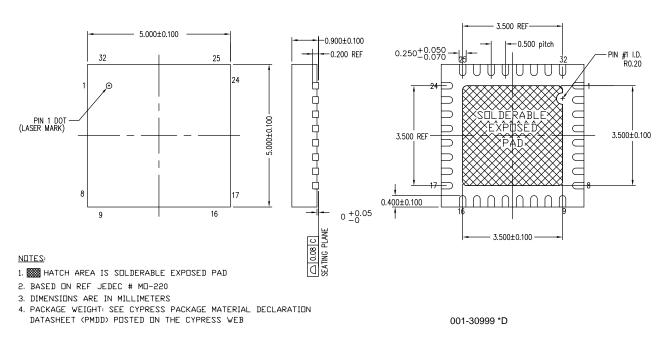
32-pin QFN (5 × 5 × 1.0 mm) LT32B (3.5 × 3.5) E-Pad (Sawn) Package Outline, 001-30999
